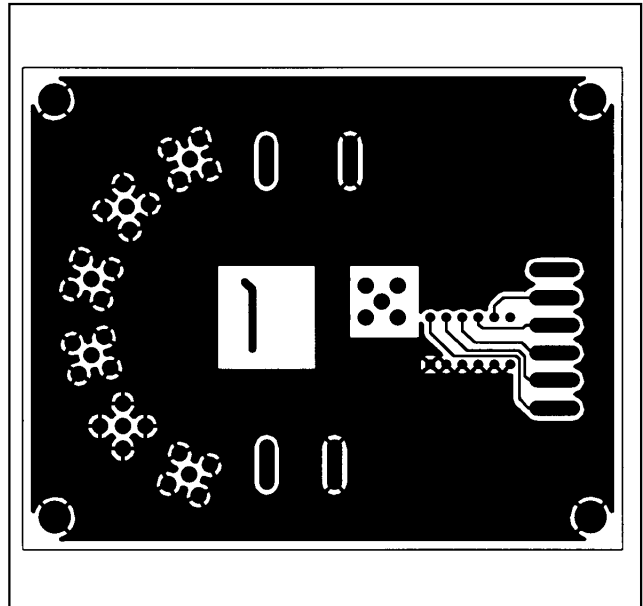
MAX4135 EV Kit PC Board Layout—Solder Side
